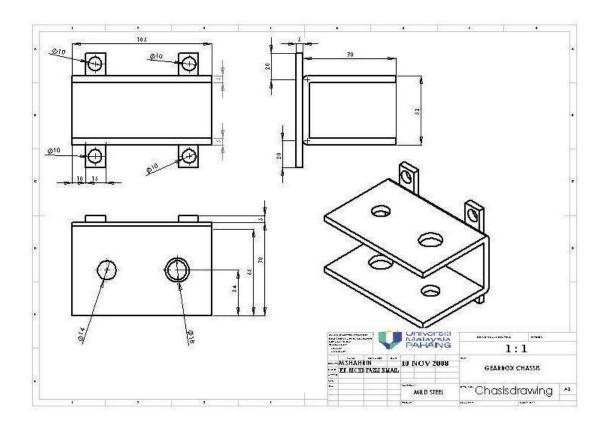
Gearbox Chassis dimensions (APPENDIX B)
